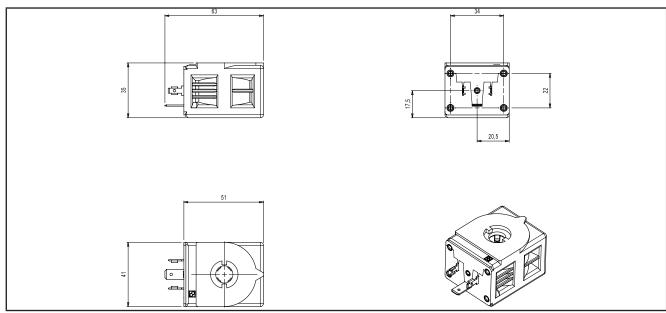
coil mechanical dimensions models PXVB0ARA60100, PXVB0ARA20100
